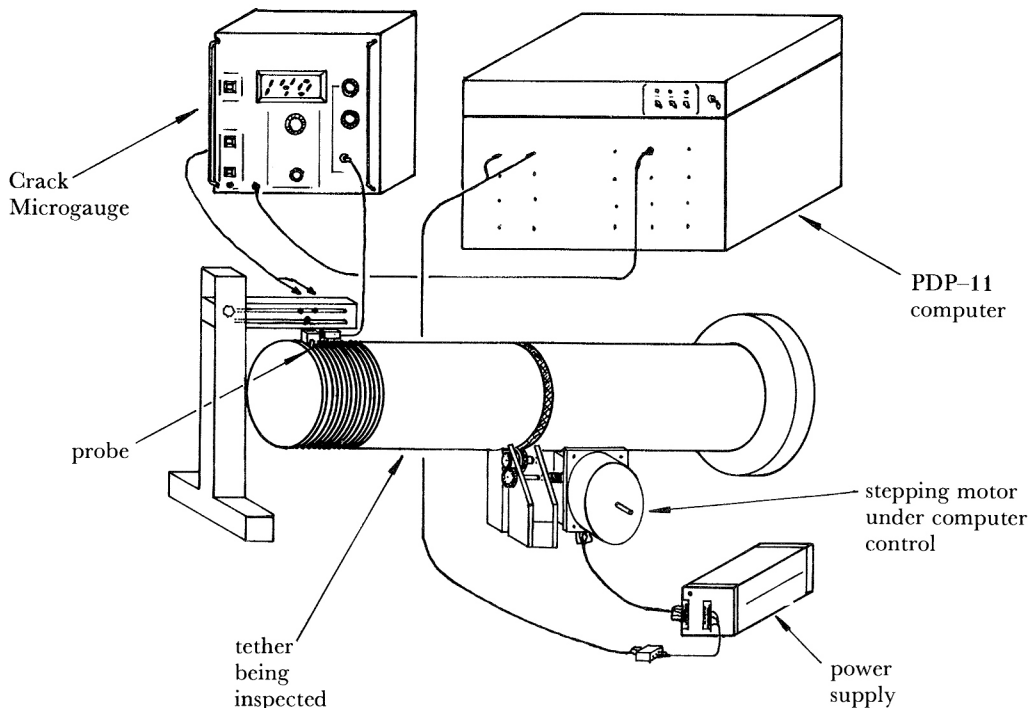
Automated inspection for crack profile in a high-strength threaded member designed for offshore use.
